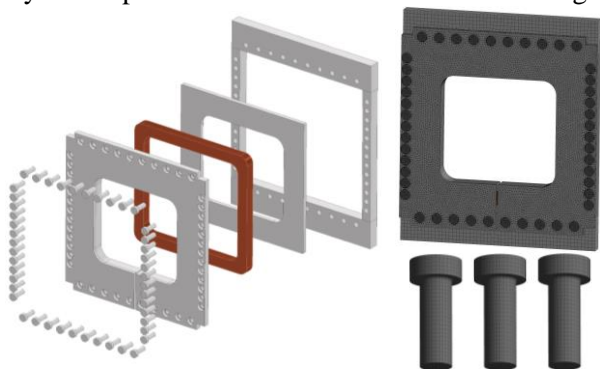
a) The exploded view of the IM CAD model; b) The mesh.
